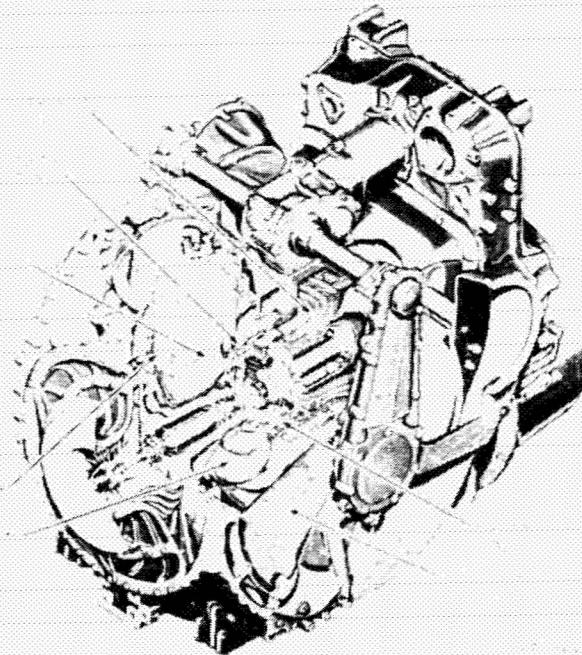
Cutaway of DDA heavy duty gas turbine engine.
